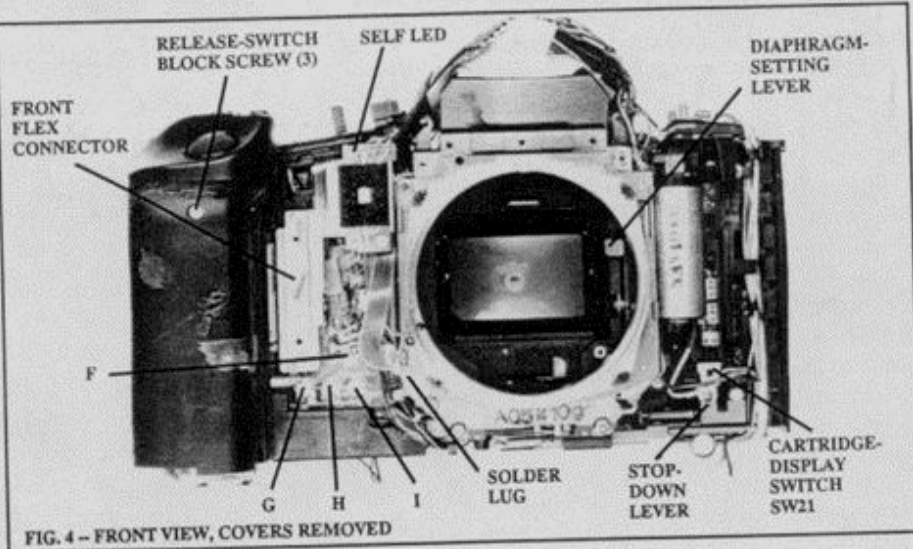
FRONT VIEW, COVERS REMOVED
